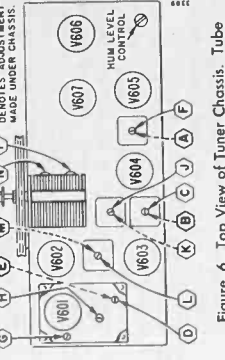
Top View of Tuner Chassis. Tube locations and alignment points shown.
